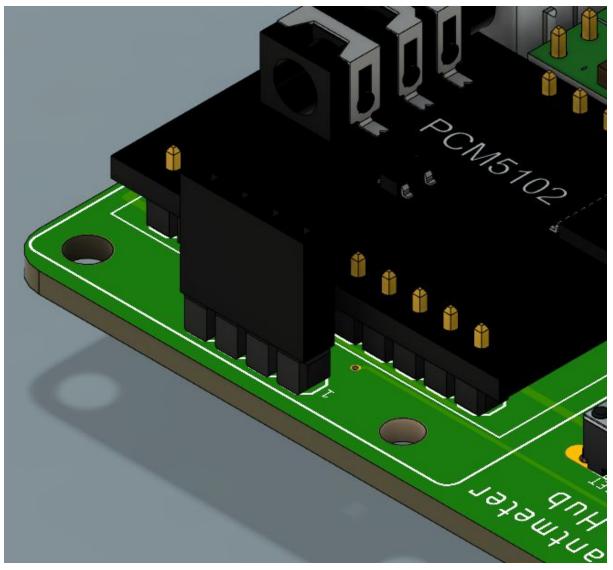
Toby PCB. Angled side view with a 1x4 pin female header placed on a 1x4 pin male header
